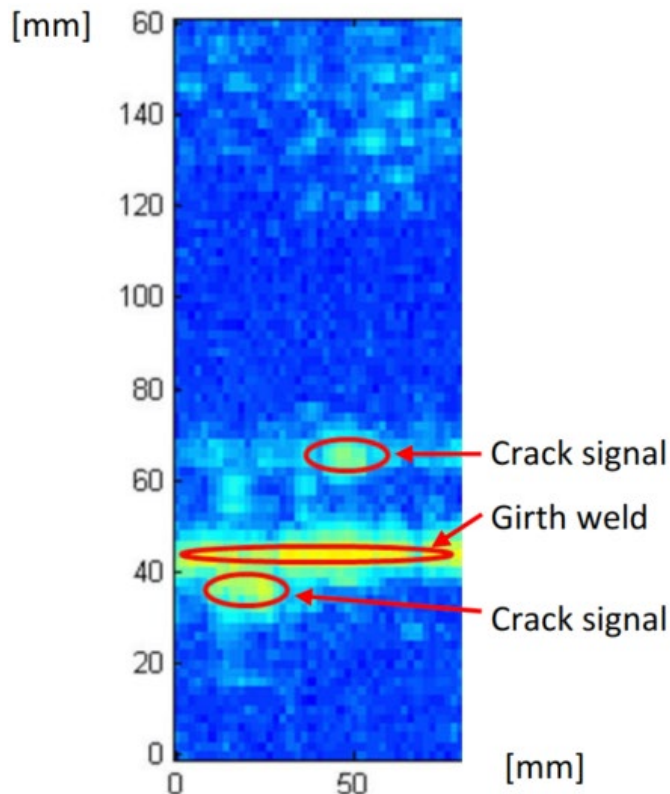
C Scan of two cracks close to a girth weld. Crack depths are 2.5 mm (upper crack signal, length 15 mm) and 4 mm (lower crack signal, length 14 mm).
